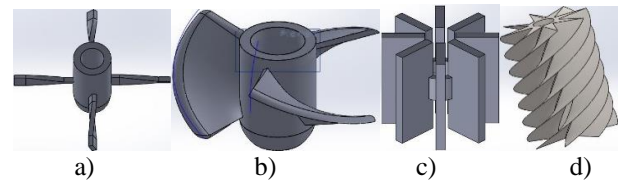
Impellers a) blades b) propeller, c) turbine and d) tape.
